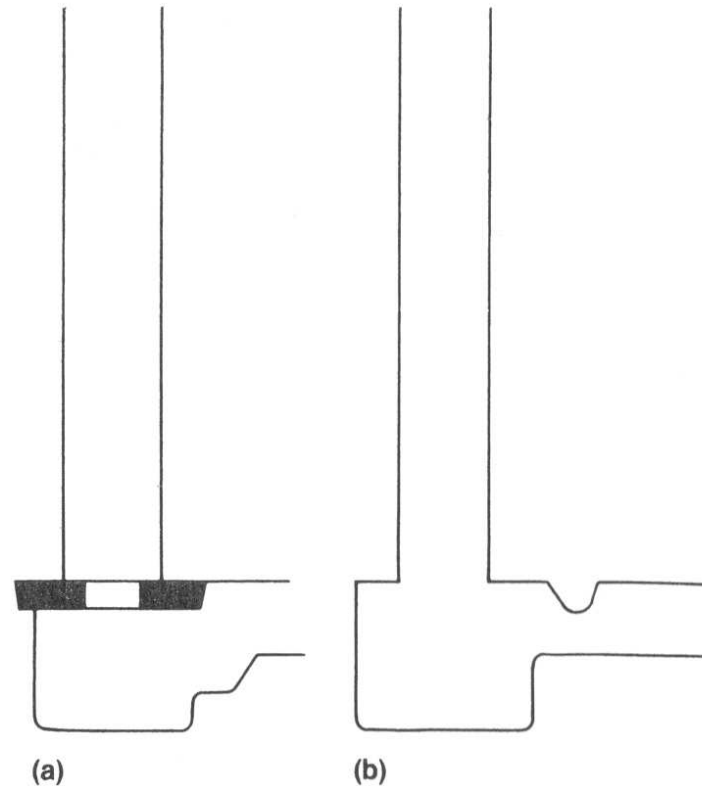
Choke mechanisms incorporated into straight-sided sprues to approximate liquid flow in tapered sprues. (a) Choke core. (b) Runner choke
